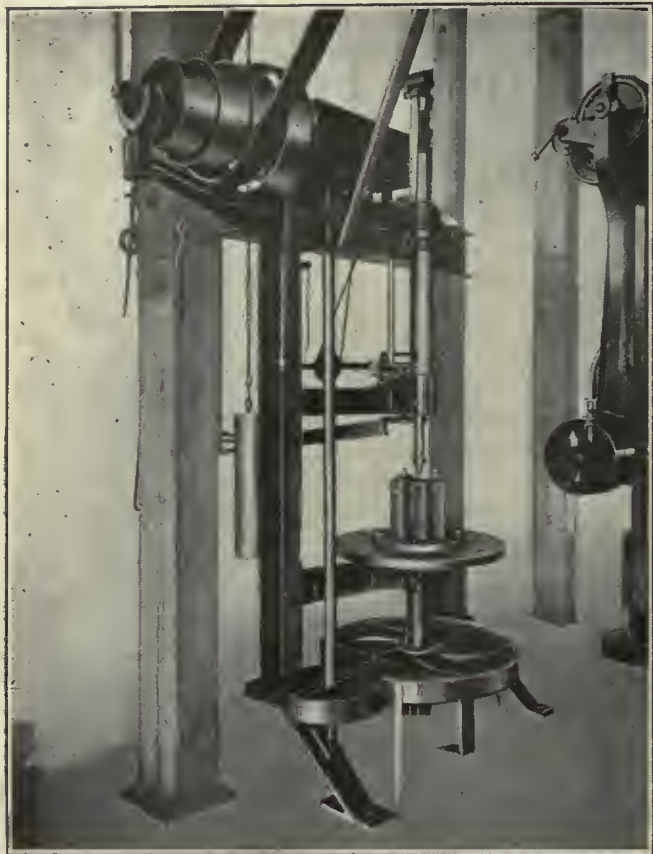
BORING MILL AND DRILLING MACHINE, BUILT BY ALVIN JENKS, PAWTUCKET, R. I., ABOUT 1833
